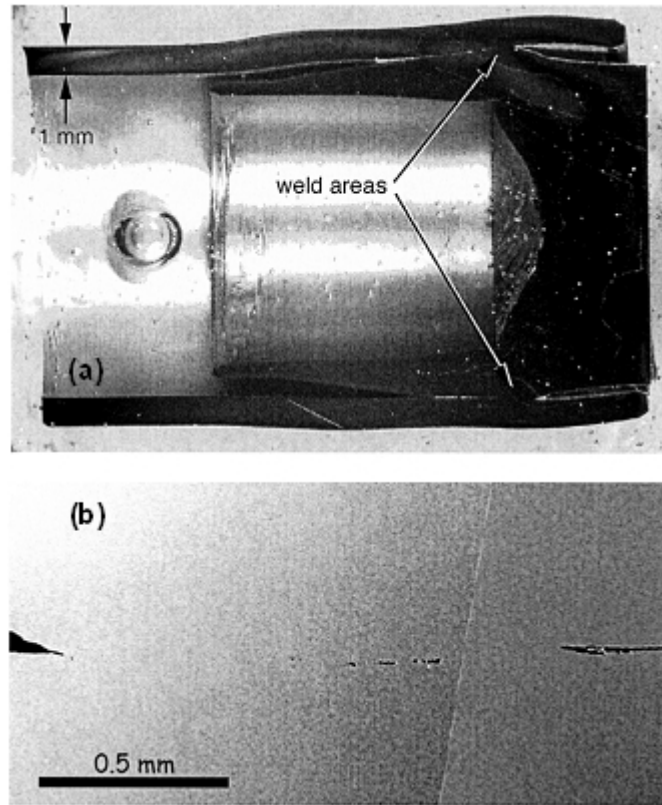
Cross section of a typical resistance forge weld showing (a) macro-view of joined simulated end cap and tube (sectioned and polished surfaces appear dark); and (b) view of the unetched welded surface.³¹
